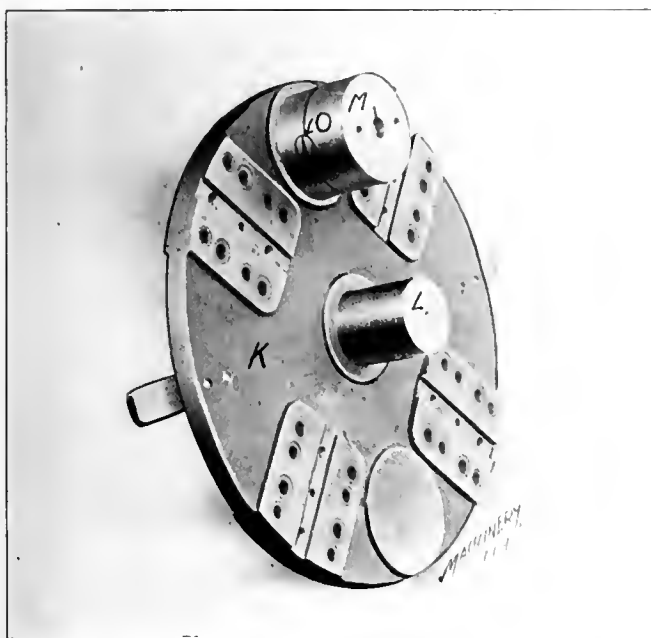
Bushing Plate for the Drilling Operation shown in Fig. 12.
